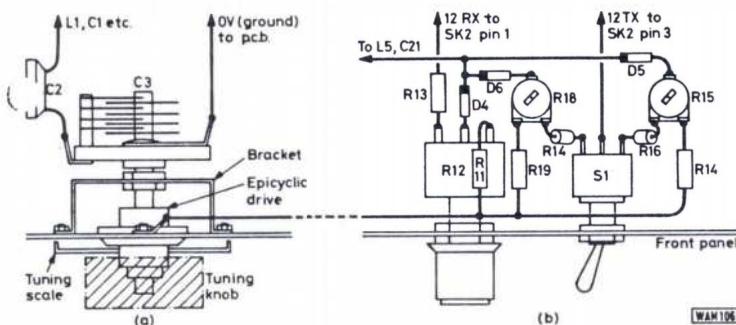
(a) Slow motion tuning drive assembly. (b) Wiring of the RIT and BANDSWITCH controls
